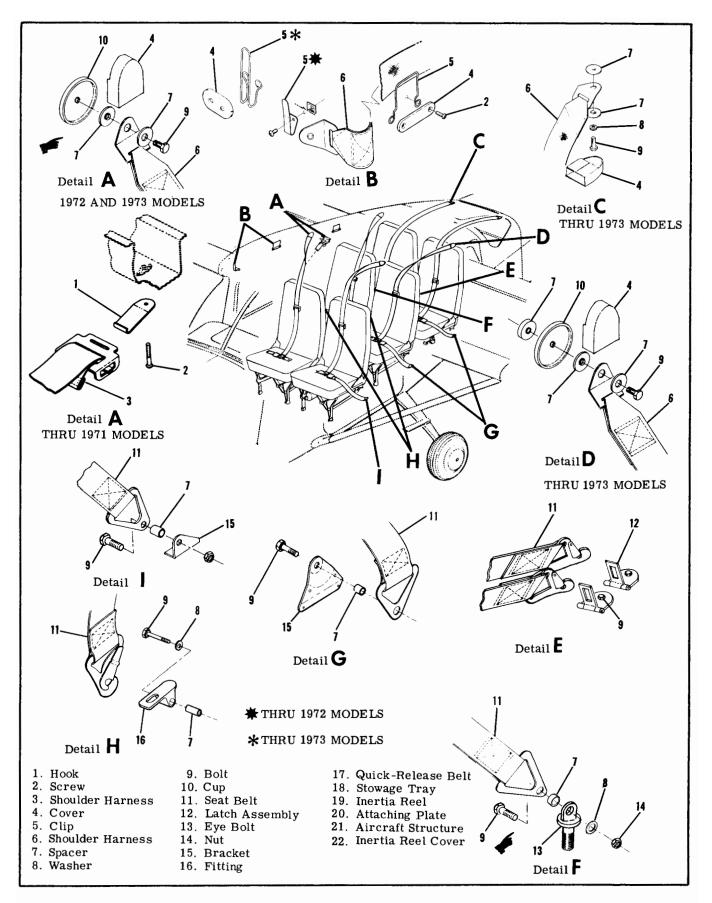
Seat Belt and Shoulder Harness Installation (Sheet 1 of 3)
